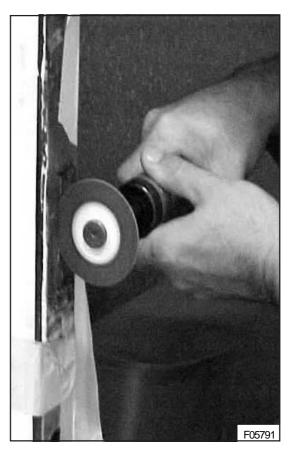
Cutting the B post to accept the striker bolt base plate assembly
